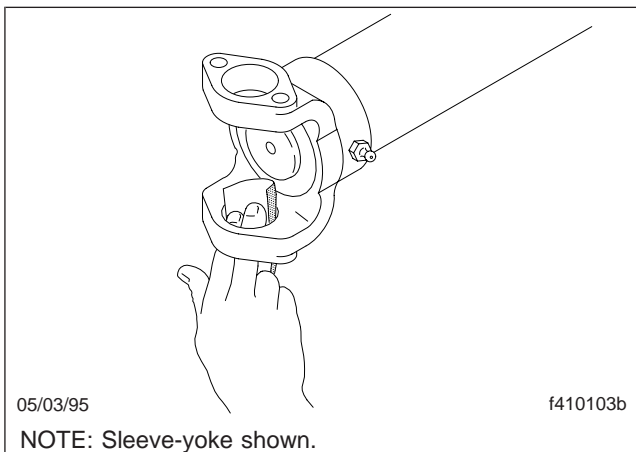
, Smoothing a Full-Round Yoke Cross-Hole
